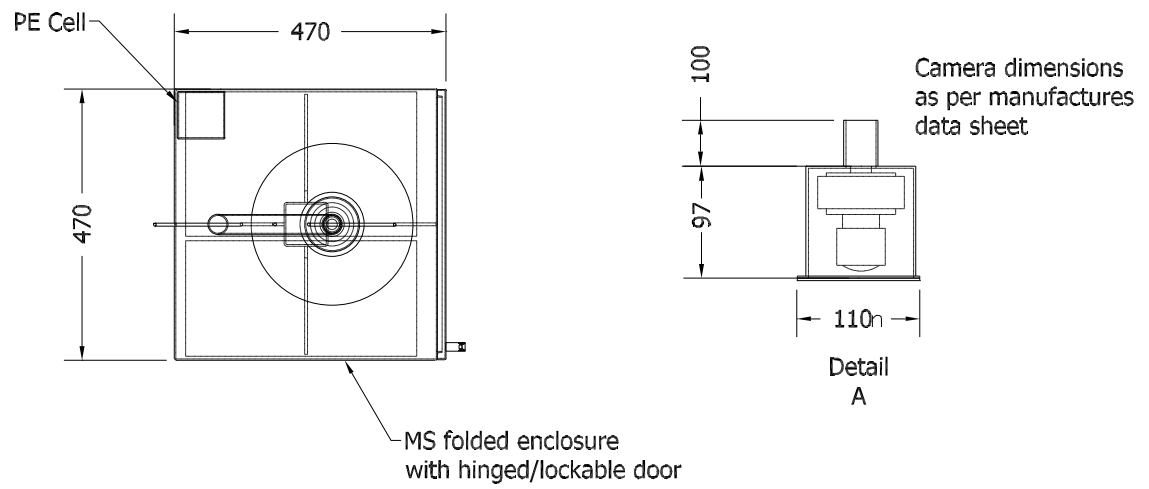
Top view and approximate dimensions of ST-4 camera weatherproof housing from Figure F.1.
